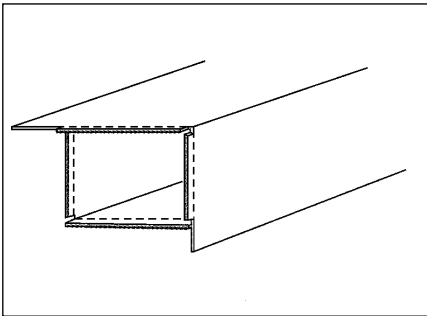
A lap joint with a very short overlap is a common sectioning joint recommendation. (Courtesy of GM)
